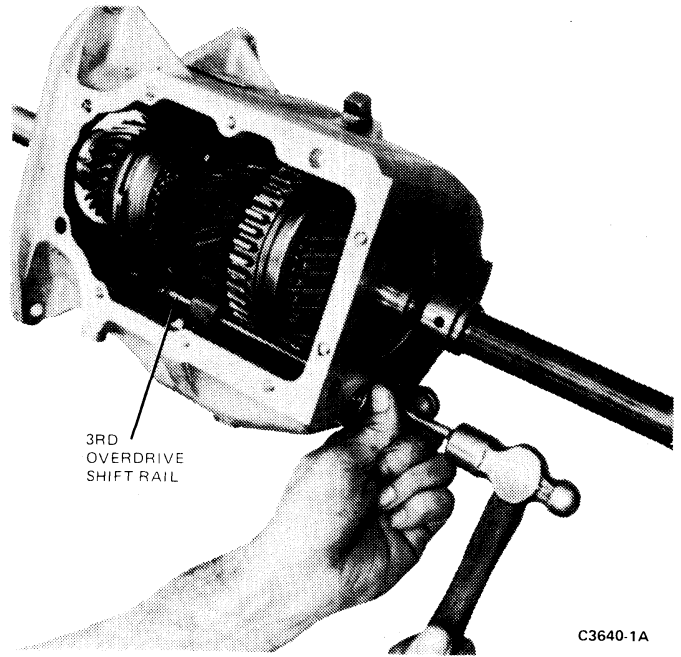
3rd/Overdrive Shift Fork Roll Pin Removal
